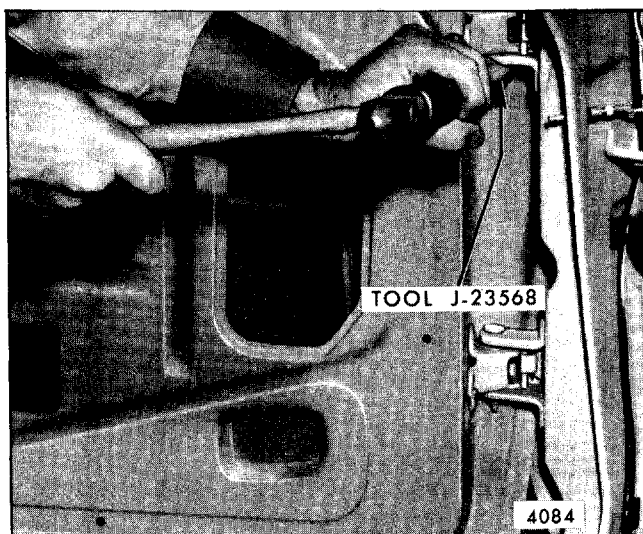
Door Hinge Pin Removal - "H" Styles
